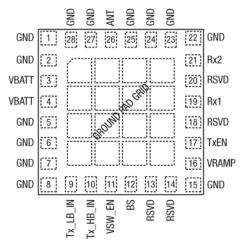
Phone PCB Layout Footprint for 6 mm x 6 mm, 28-Pad Package with Grid-Bottom Solder Mask – SKY77550 Specific.
